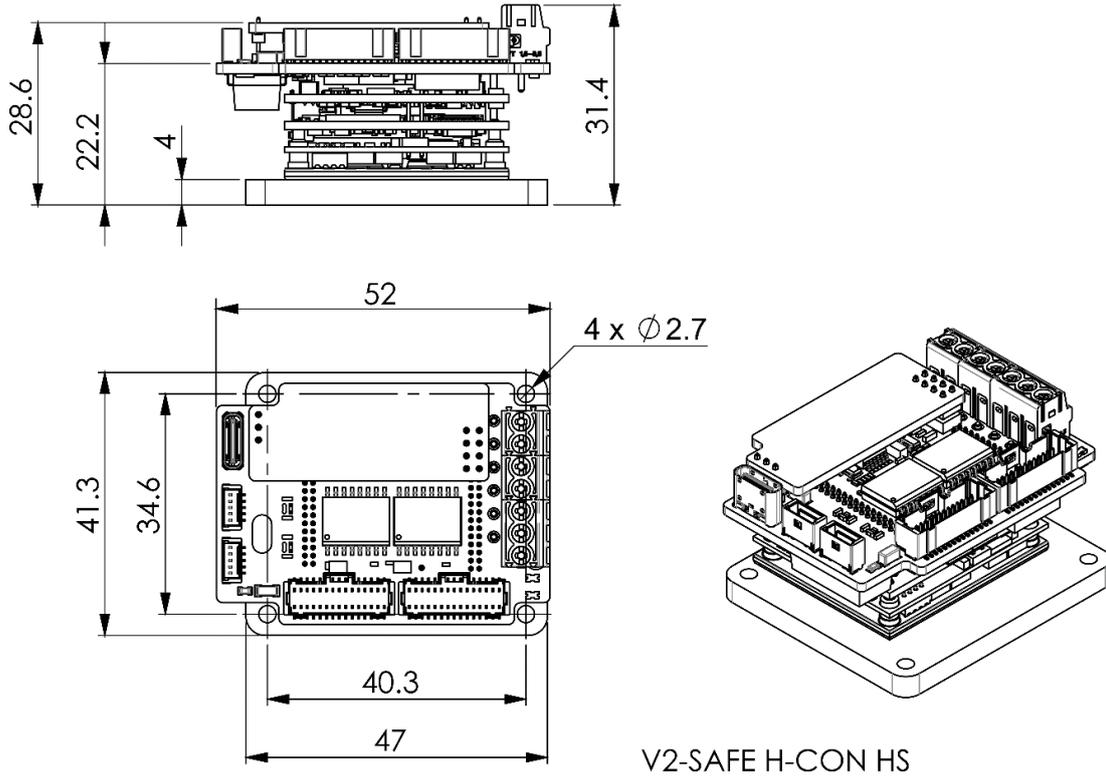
Platinum Solo Twitter – Horizontal Connector version with Heat Sink Dimensions
